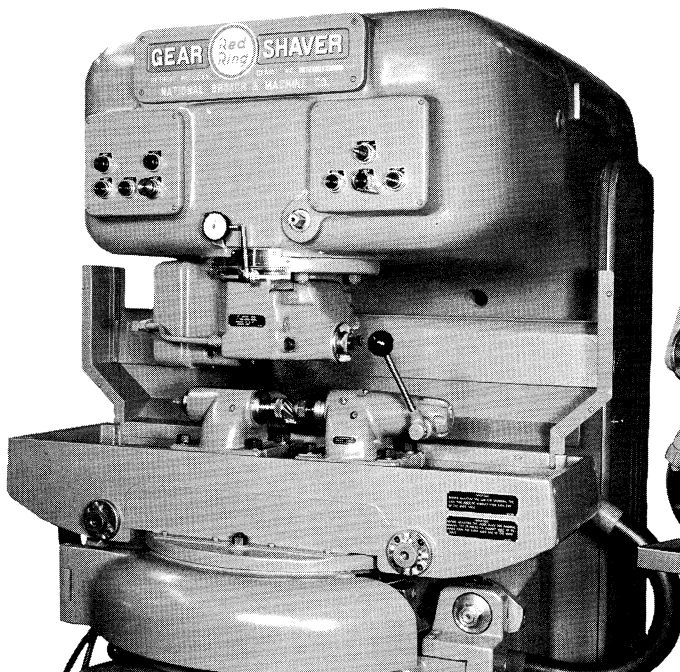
Red Ring Model GCU shaver equipped for manual loading shows location of cutter above the work.
